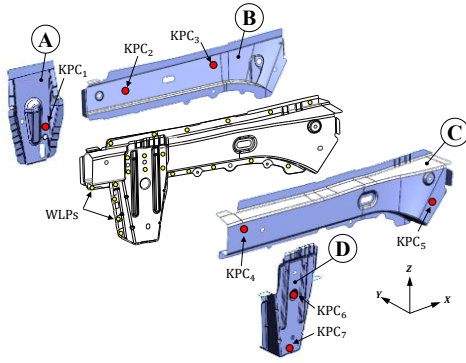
The automotive front rail parts, KPCs, and WLPs
